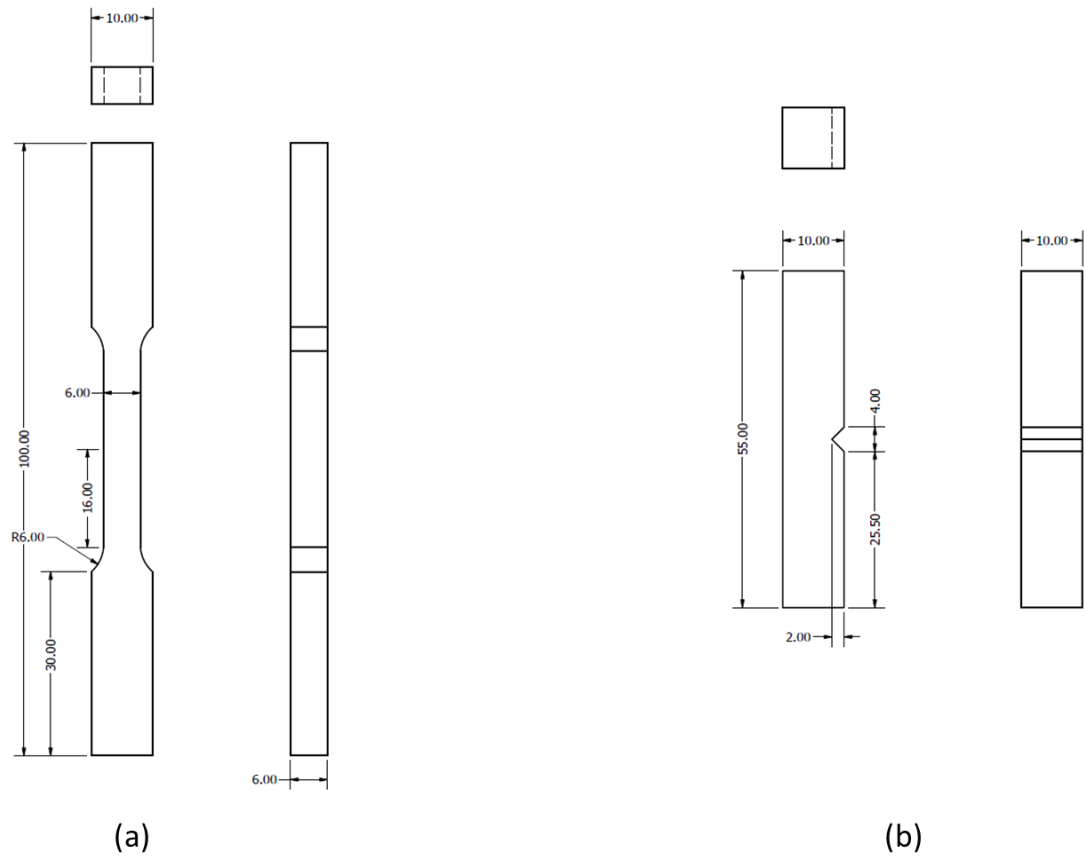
Dimensions of SLM built test coupons (a) tensile test coupons, (b) Charpy test coupons
